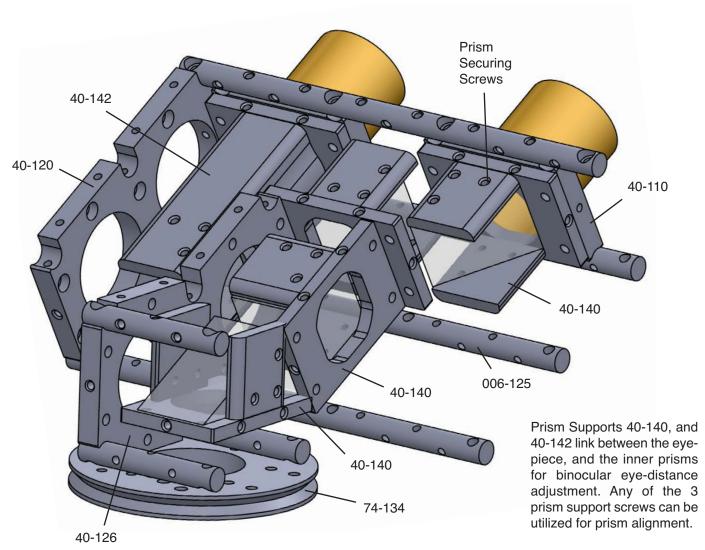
Inclined Combination Mount 40-126 for 30° Viewing
